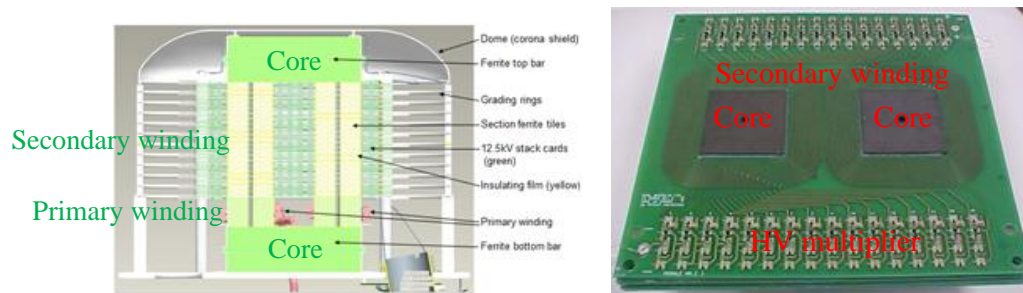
Packaging by stacked printed circuit board (PCB) technology [2-98]
